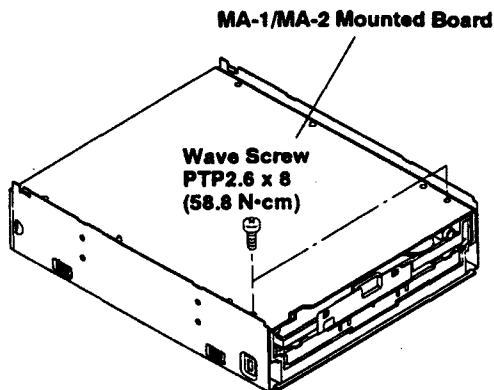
(a) MA-1/MA-2 Mounted Board Replacement
